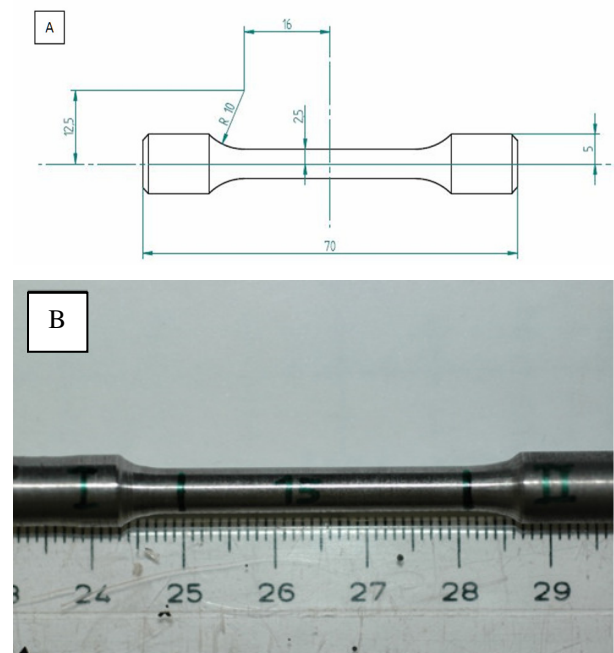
"Dog bone" shaped specimens used for standardized tensile tests: a) geometry; b) final dimension control.
